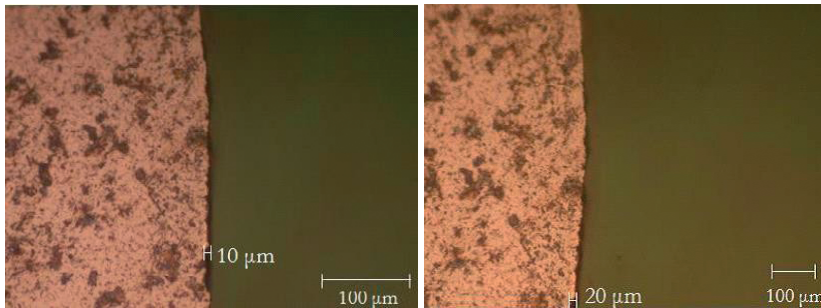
Edge of PCD surface obtained by Micro WEDM and WEDM
